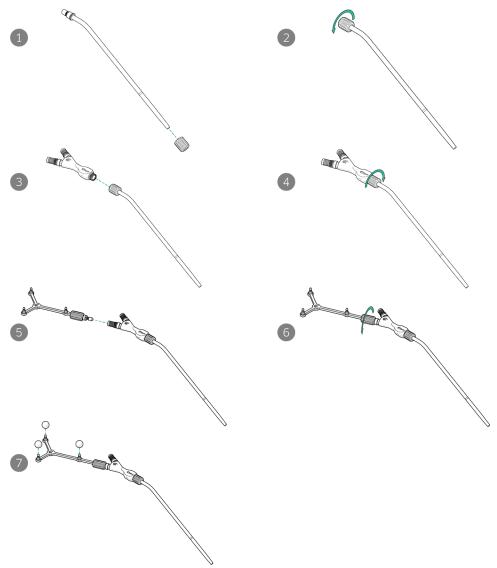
Trackable Suction assembly steps. Reverse these steps to disassemble.
